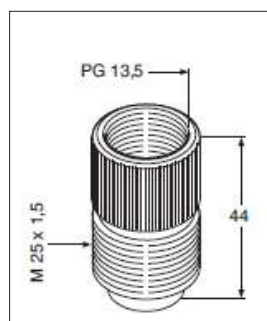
Dimensional drawing K1520JN, K1500DV, K1520JP
